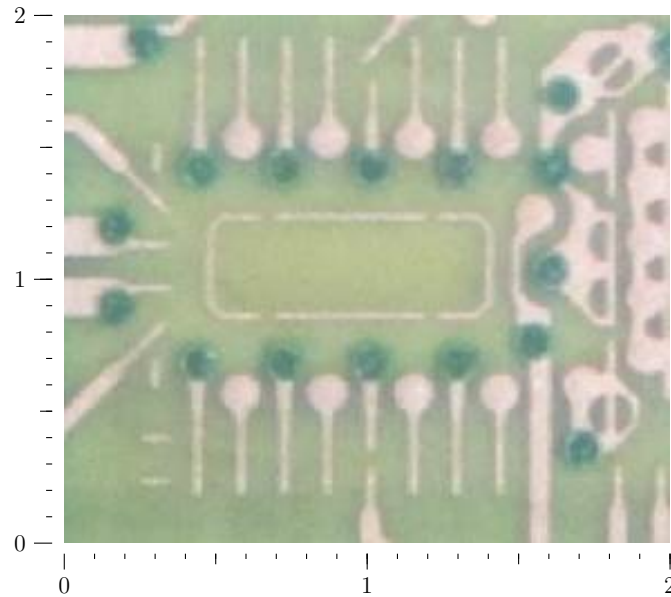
ATETP implemented combiner-in-package with millimeter ruler. Combiner edges are $0.5 \times 1 \text{ mm}$ wide
